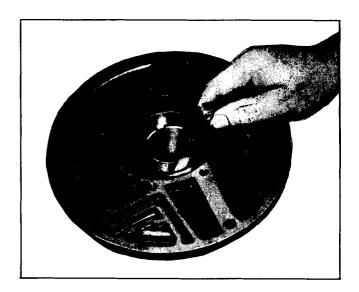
F-66 Checking Pump Body Bushing-To-Converter Pump Hub Clearance
